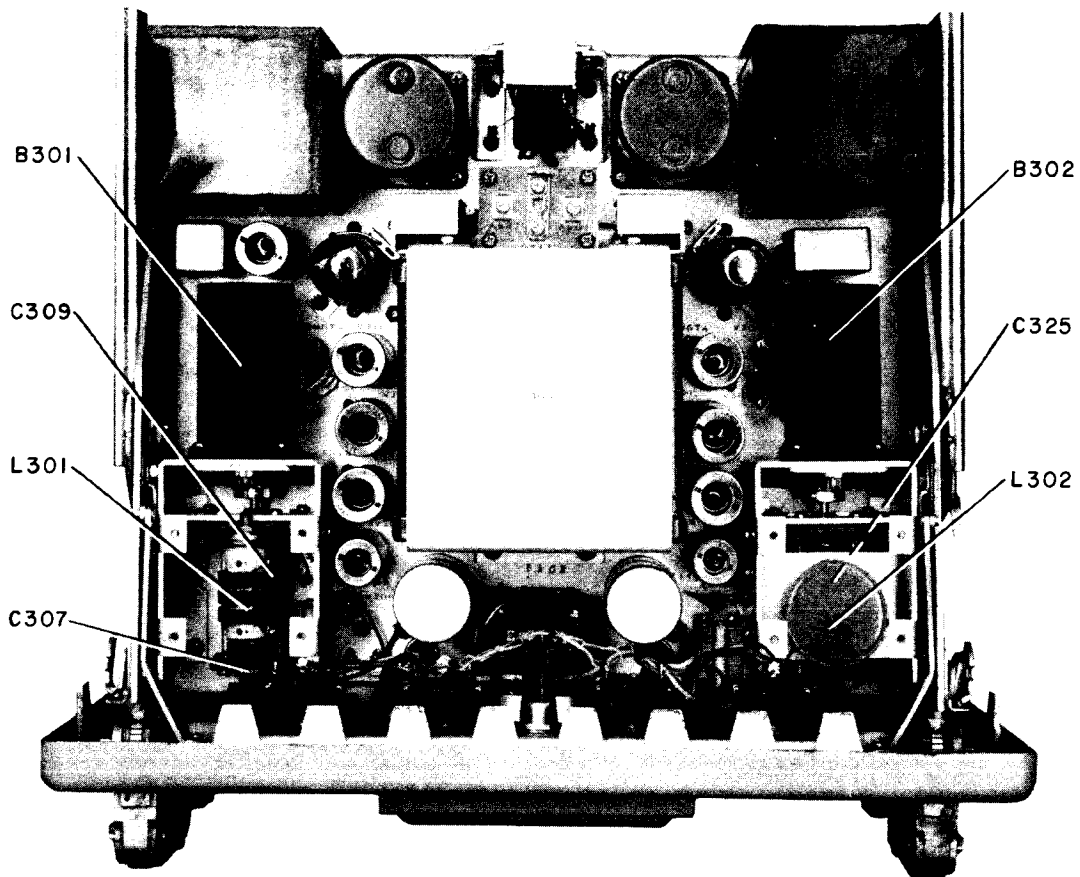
Identification of Motor-Tuning Capacitor Assembly Parts
